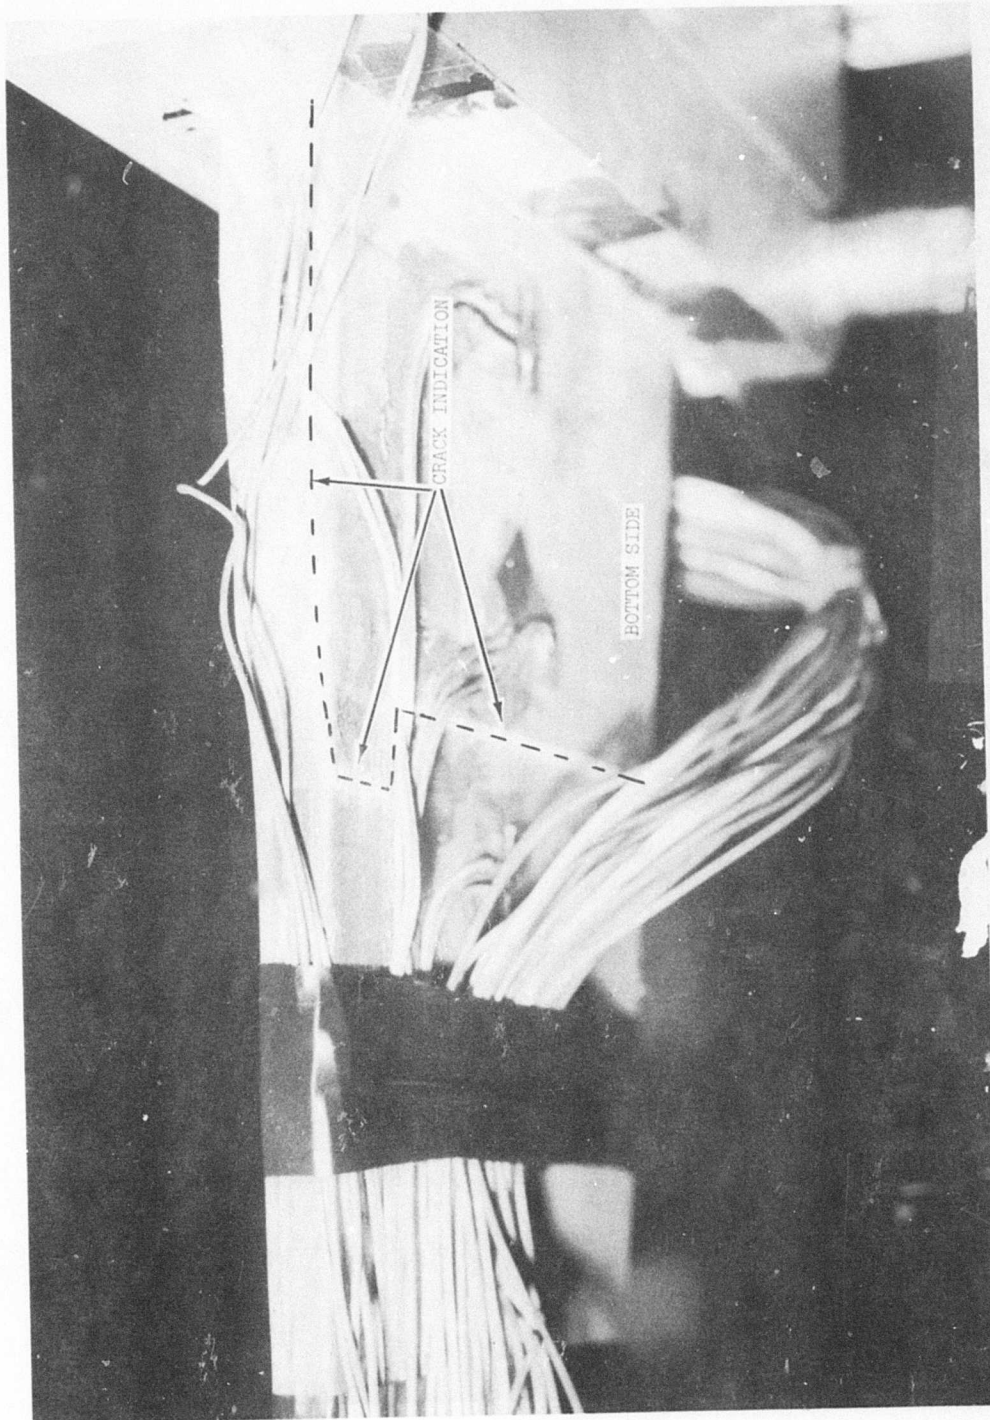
Fatigue Test Specimen Depicting Crack Indication Extending Onto Bottom Side.
